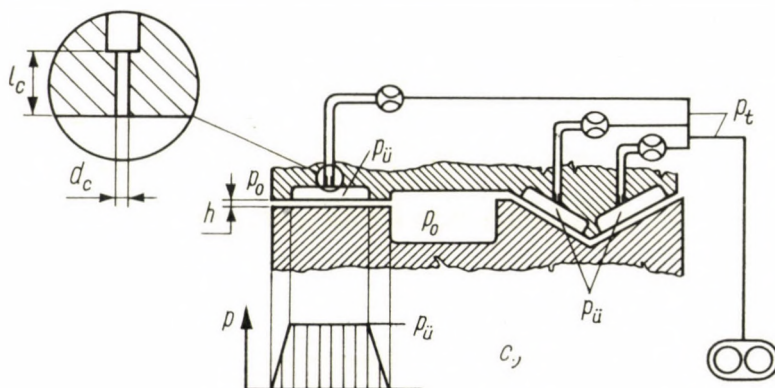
Sketch of non-prestressed hydrostatic slideways
